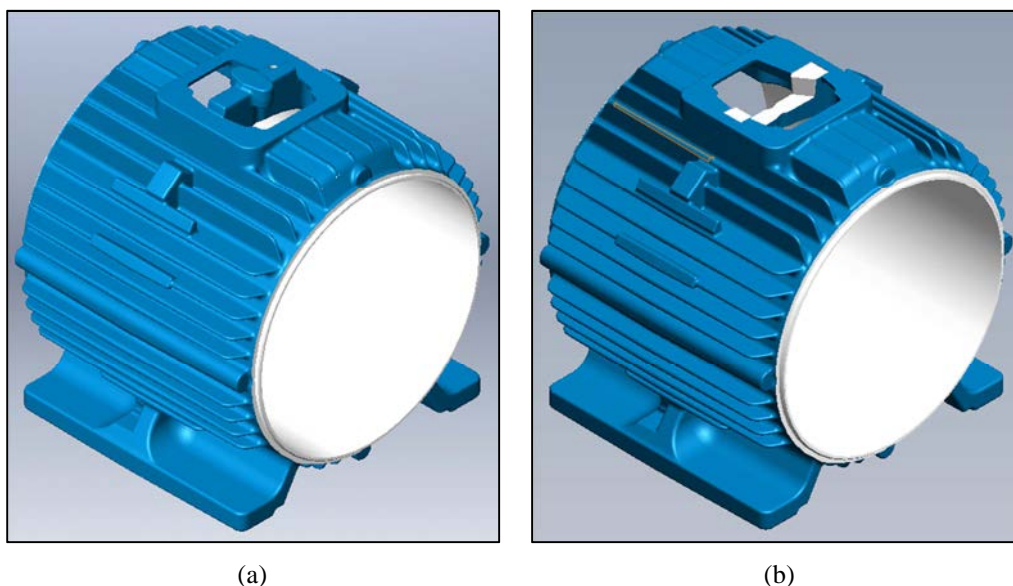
(a) Standard frame and (b) proposed frame, with machined hoop.
